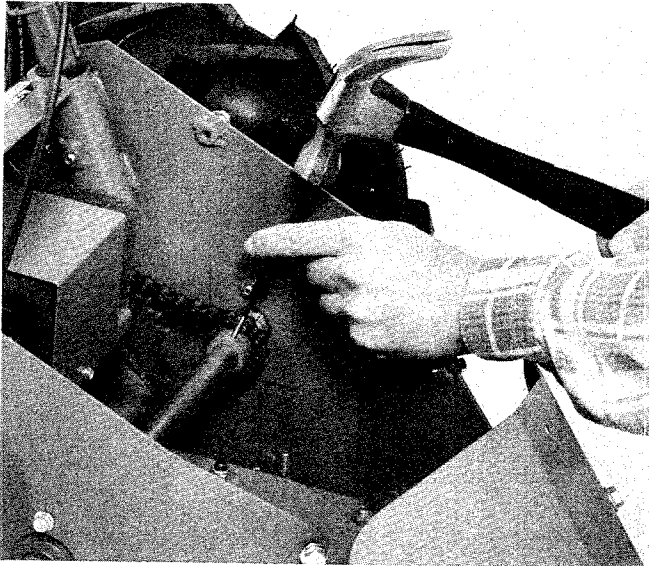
Driving the spirol pin back into the jackshaft sprocket/jackshaft.
